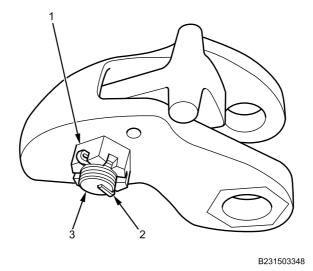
Towing Pintle Hook Upper Jaw Assembly.
